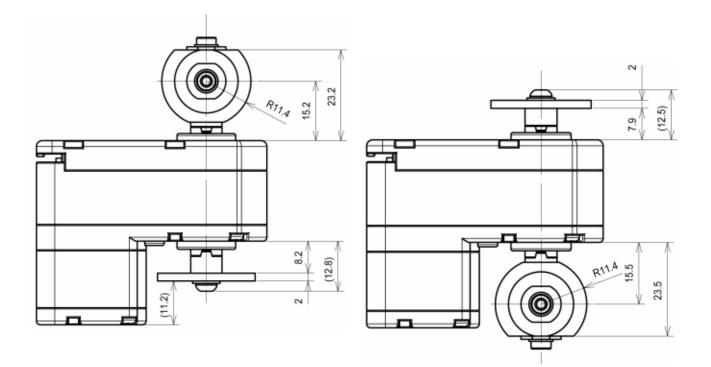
RS601CR and Joint Ball with Long Shaft
